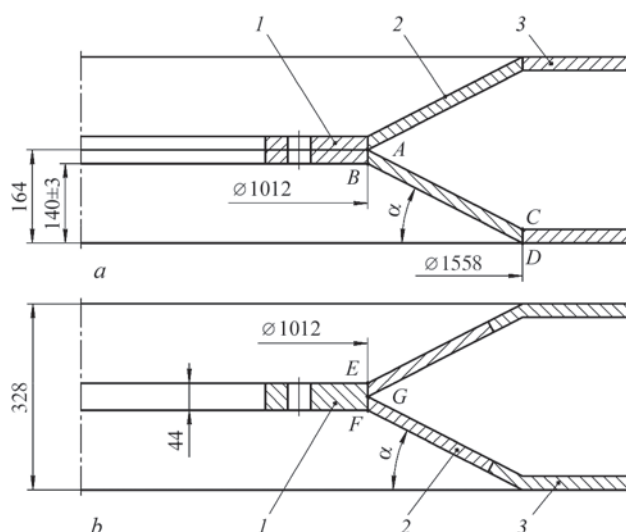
The first (a) and second (b) variants of performance of welded disk of smoke exhauster impeller: 1 — ring; 2 — shell; 3 — edge
